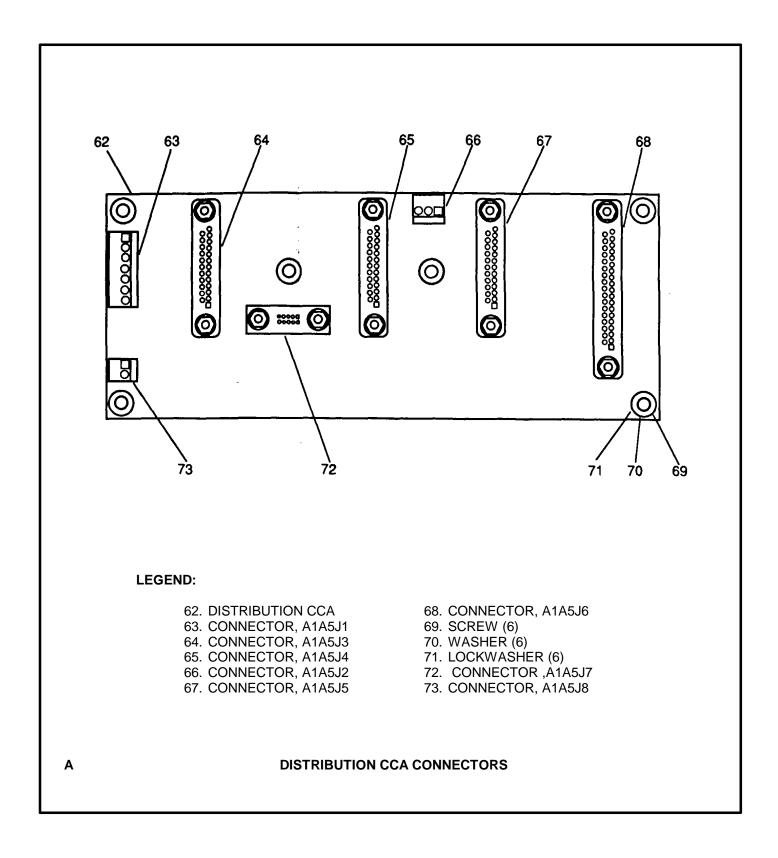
TS-4295/G Exploded View (Sheet 1 of 3)
